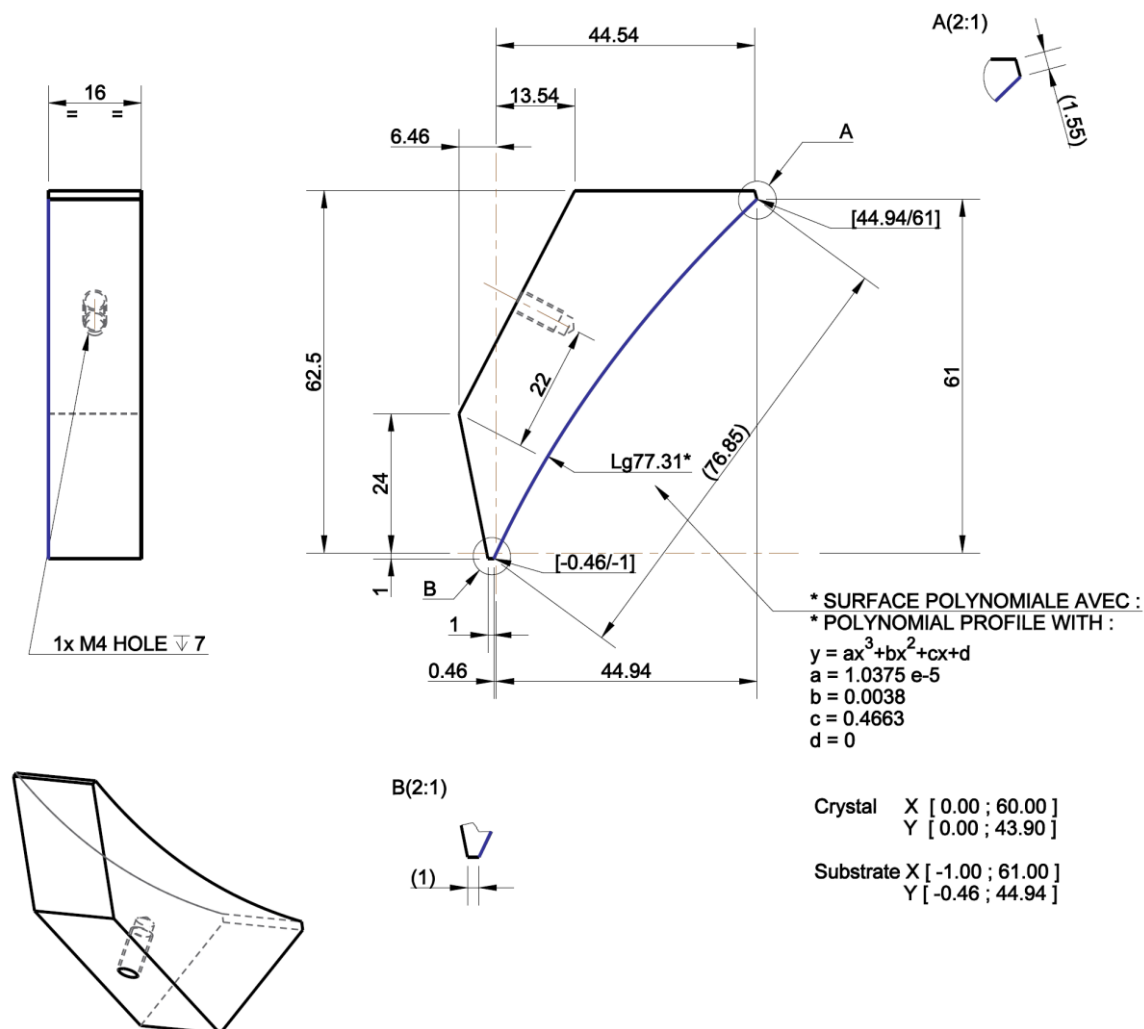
Schematic Drawing of Si(422) Crystal 4. The supplier shall generate required engineering drawings as per specifications given in Table 11
